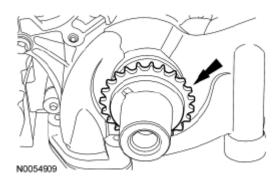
Locating Crankshaft Timing Chain Sprocket Courtesy of FORD MOTOR CO.
